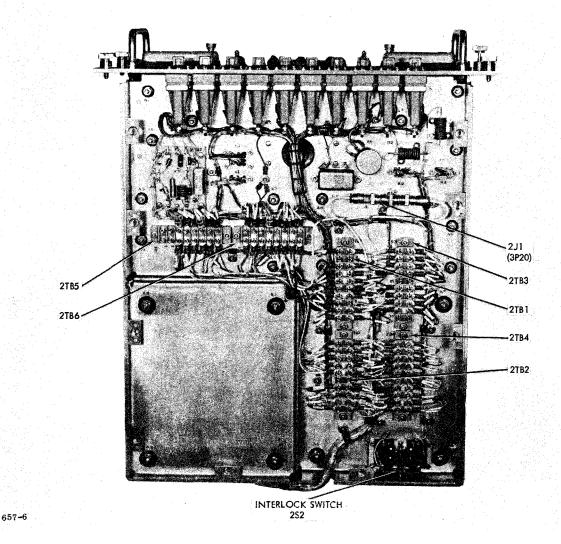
Power Supply PP-2796/WRA-3, Unit 2, Bottom View
